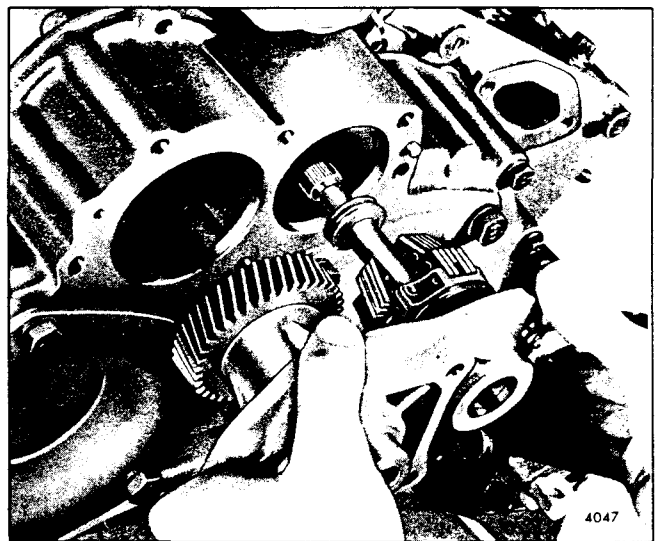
Removing/Installing Blower Drive Support (6V-53 Engine)
